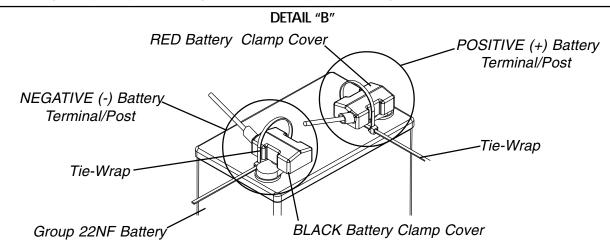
CONNECTING BATTERY CABLES - BATTERY CLAMP METHOD
